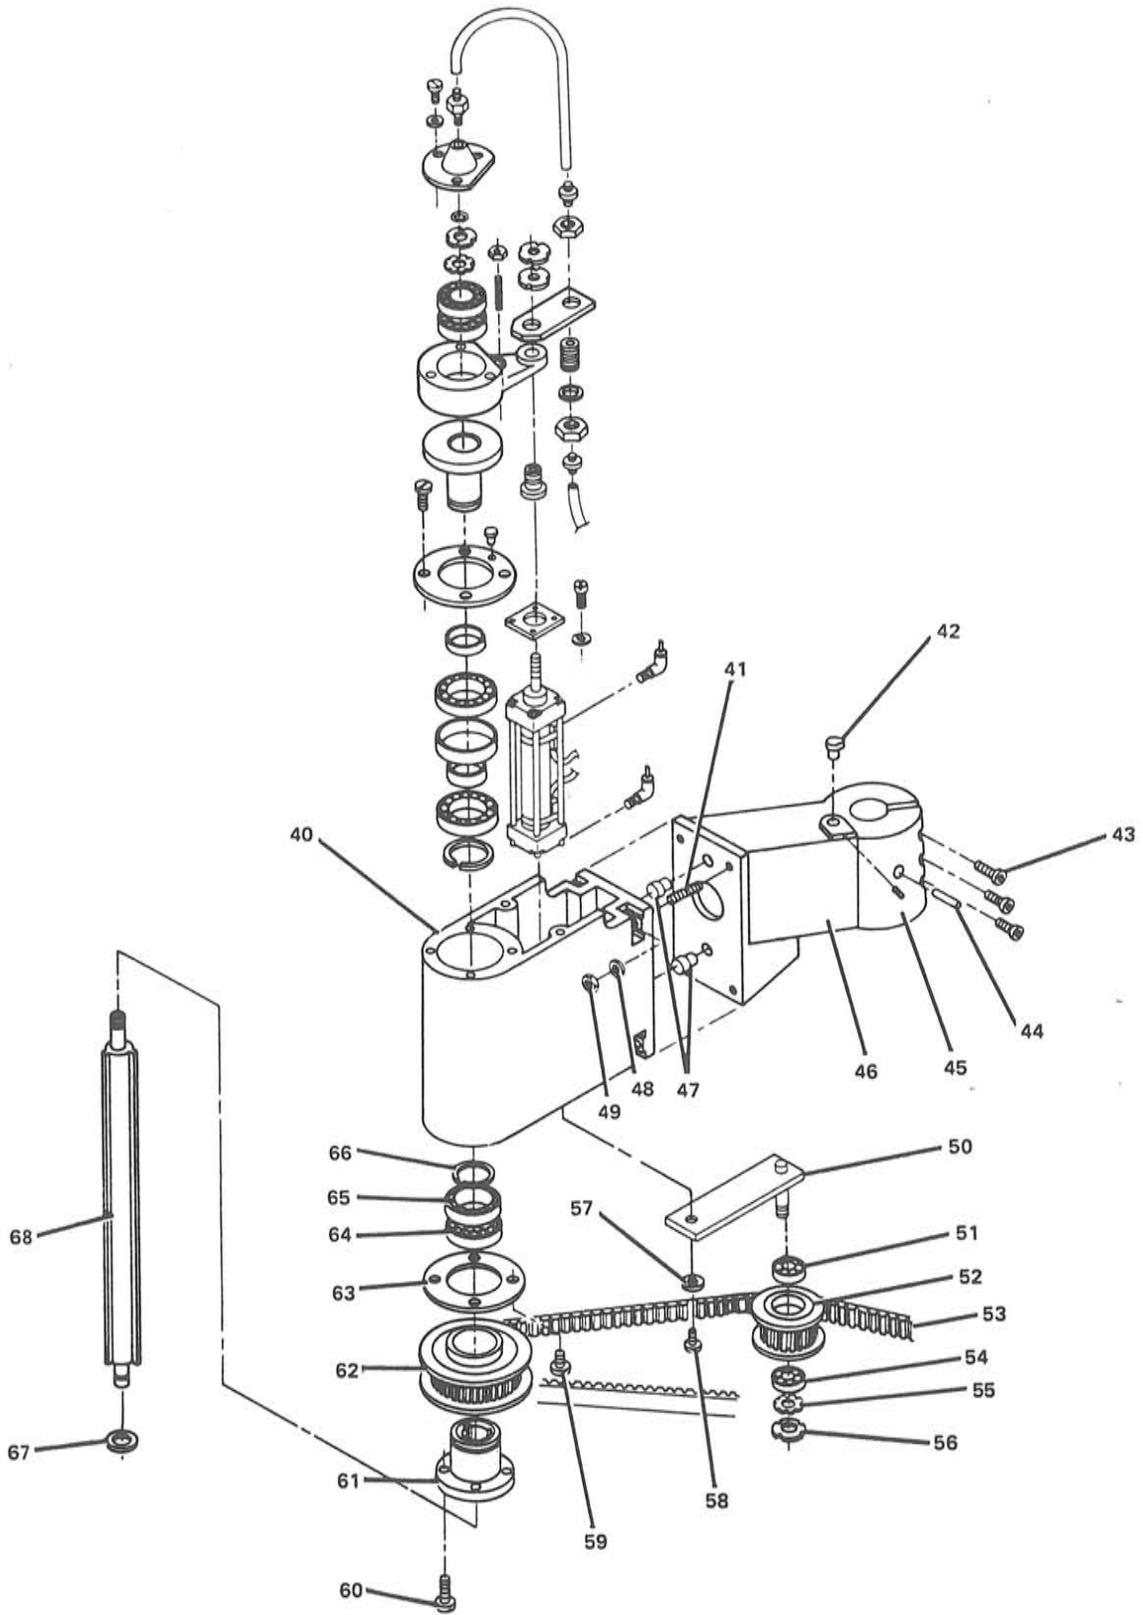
Z-AXIS ASSEMBLY. SHEET 2 OF 2. INDEX NOS. 40-68. SEE LIST 1.
